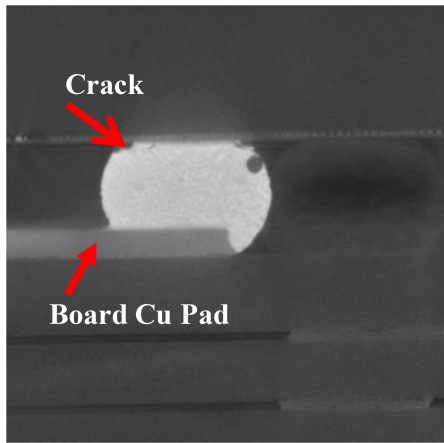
X-ray image of a failed corner bump showing a crack in solder bump above UBM and the board Cu pad and wiring trace.
